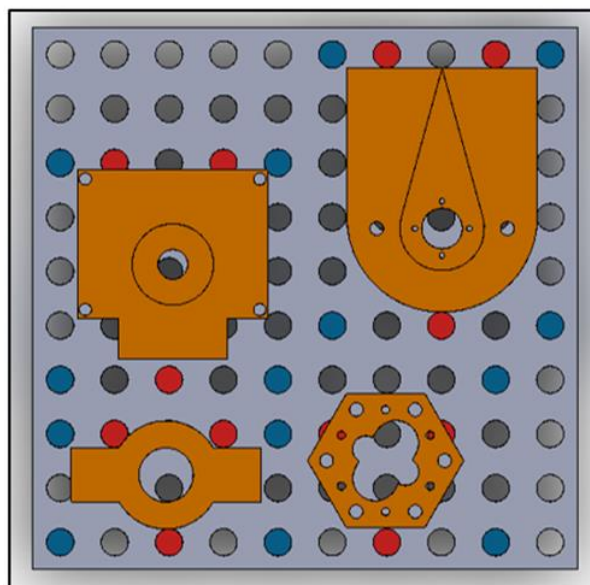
Multi-workpiece layout result (a. packing carb, b. filter cleaner, c. bearing hanger, and d. oil pump gear)
